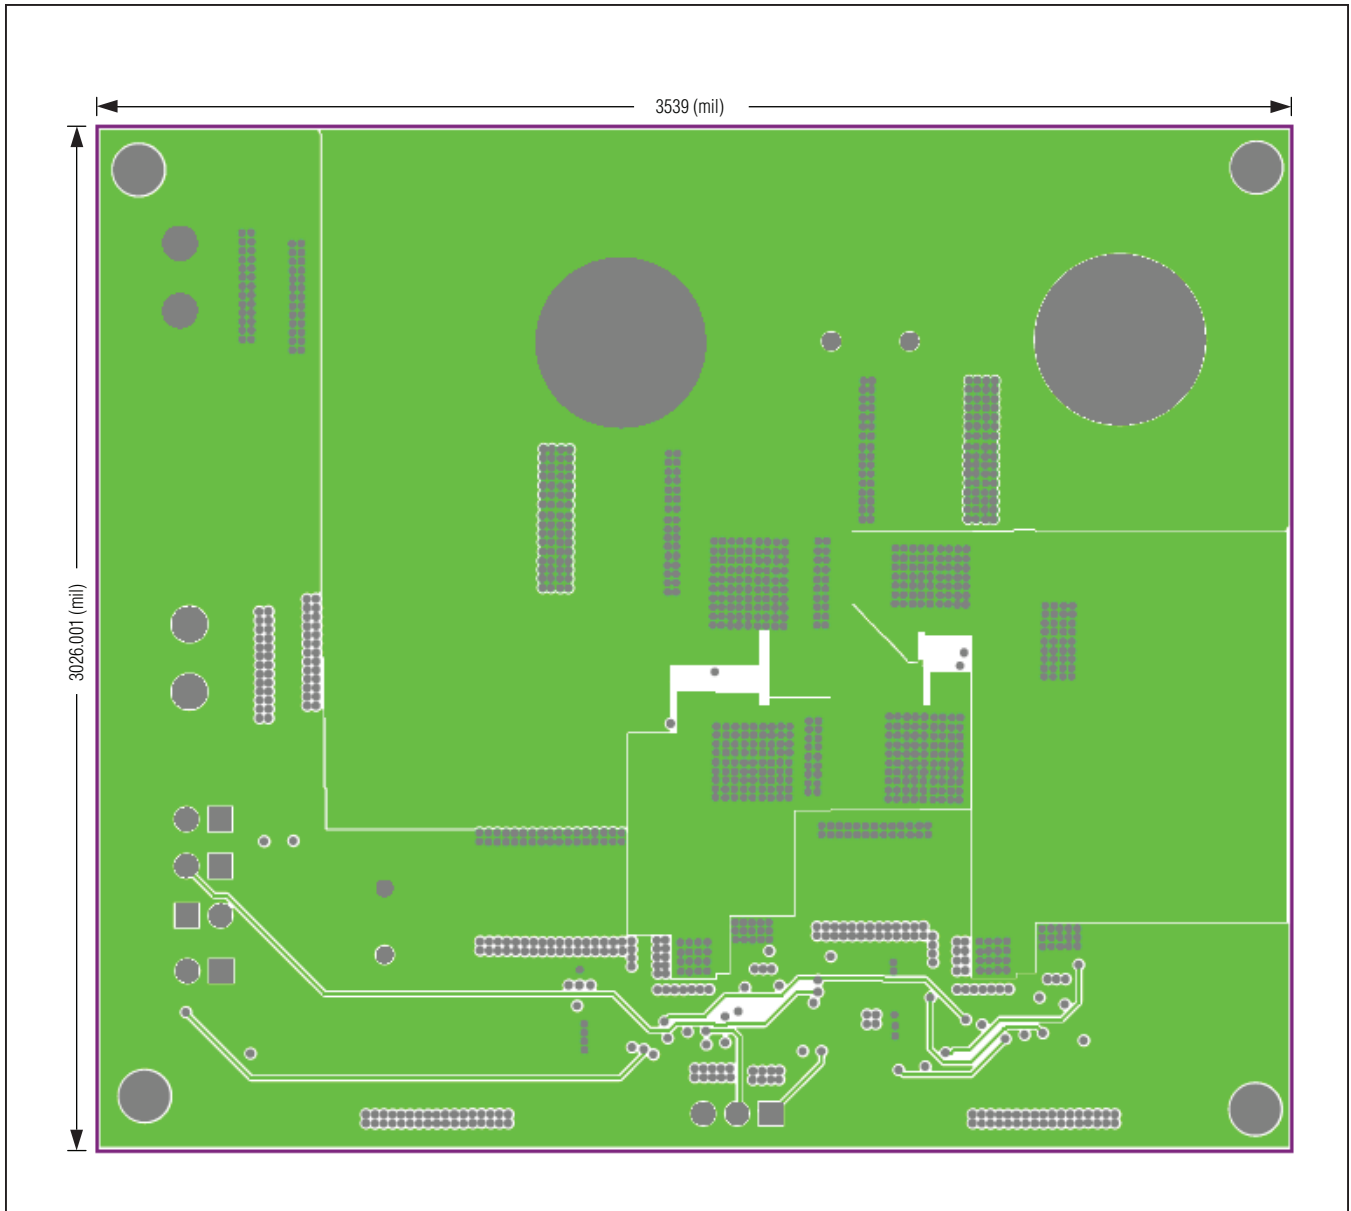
MAX8686 EV Kit PCB Layout—Layer 4 (VOUT, PGND, and LX)
